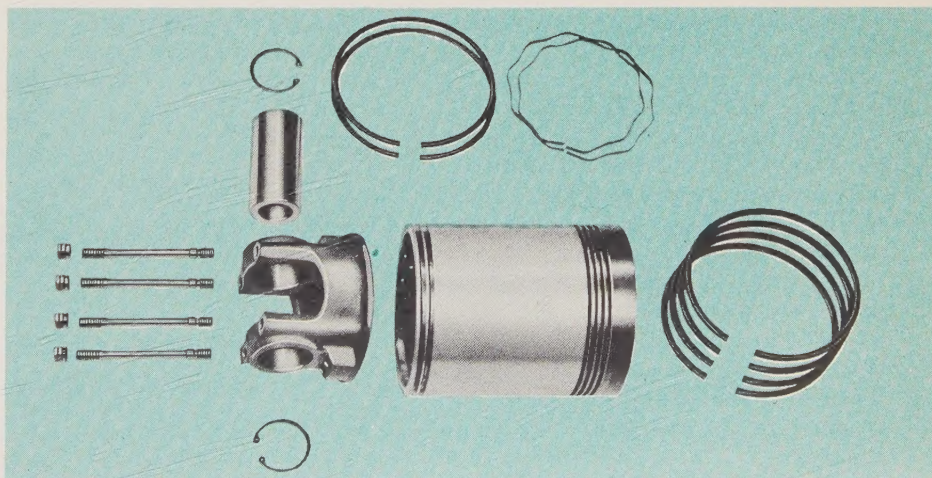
Disassembled component parts of the piston which is made of a high-grade alloy steel. The trunnion, which carries the wrist pin, is bolted to the inside of the piston.
